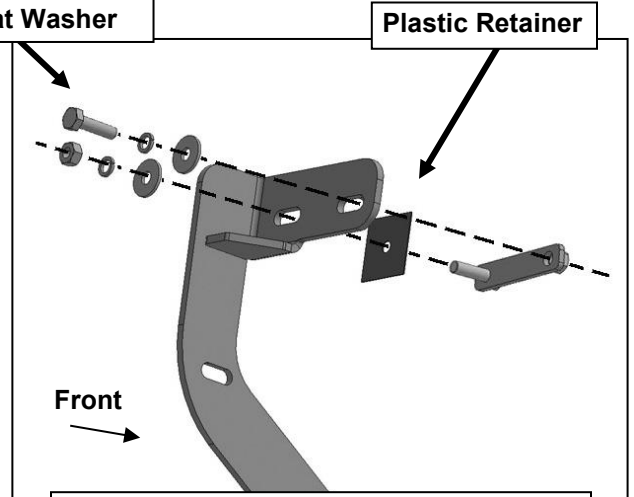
Thread Plastic Retainer onto Bolt Plate to hold Bolt Plate in position.
